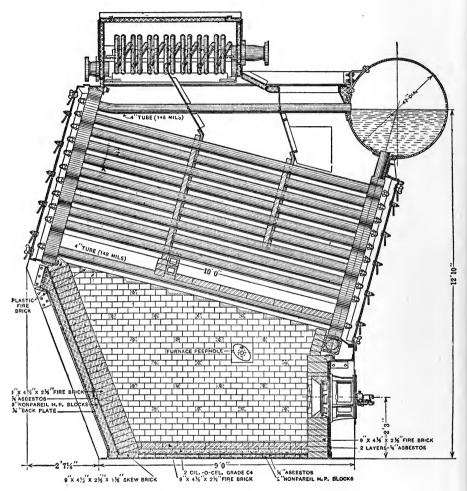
Babcock & Wilcox boiler fitted for burning oil.
